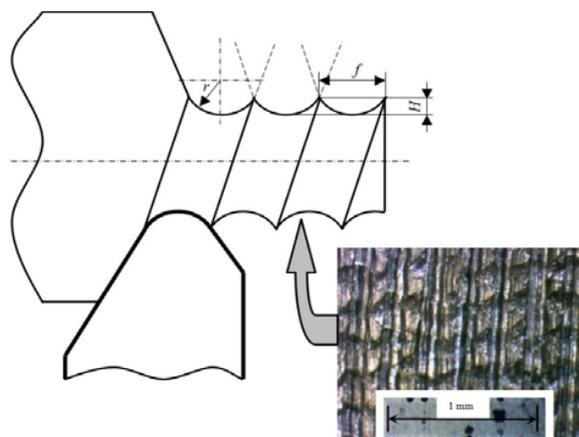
Metal cutting mechanism and the quality of the machined surface
